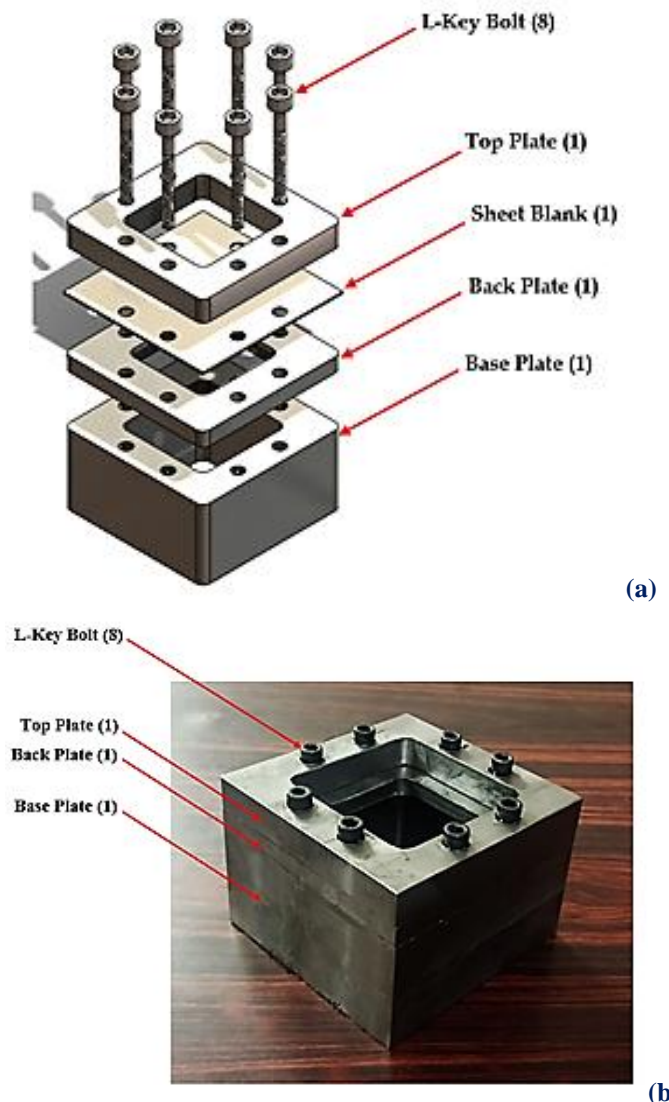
(a) CAD model of support fixture; (b) Actual support fixture.
